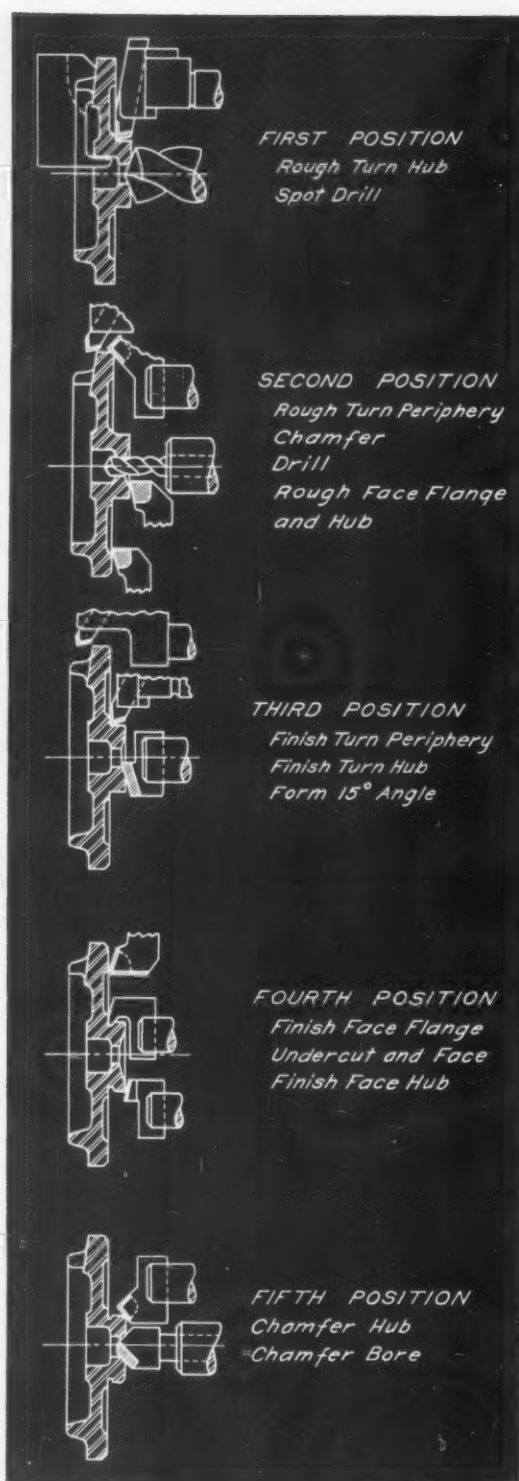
Tooling employed on single-spindle, automatic chucking machine for producing cast-iron pulley end-bells in a four and one-half minute cycle.
